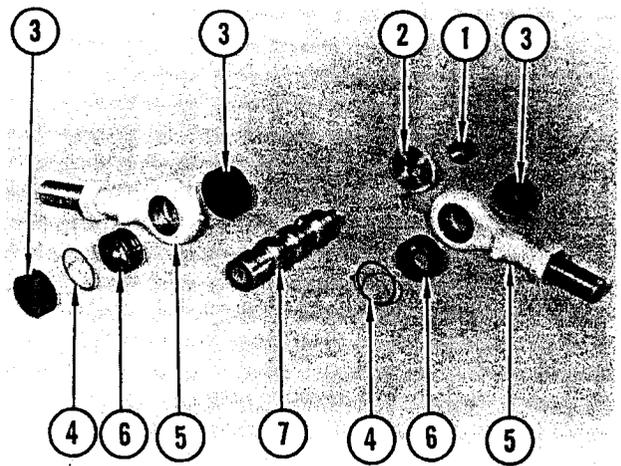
EXPLODED VIEW OF BALL SHAFT
